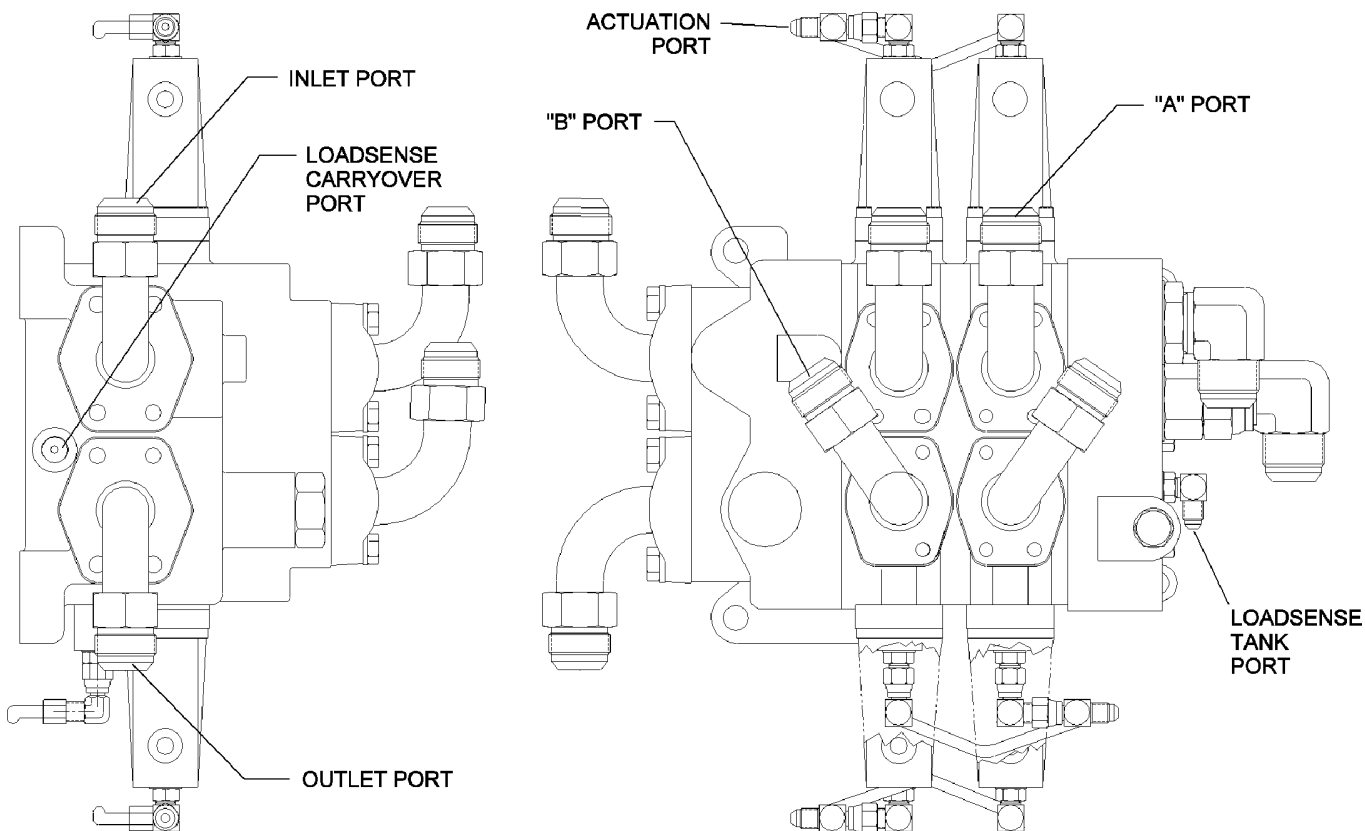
MP18 Jack/Feed Control Valve (ref. 410091)
